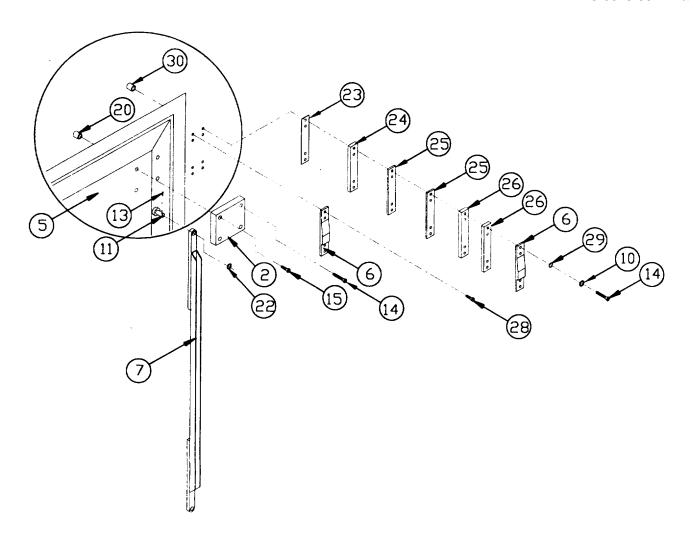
DOOR ASSEMBLY (SHEET 1 OF 5)
